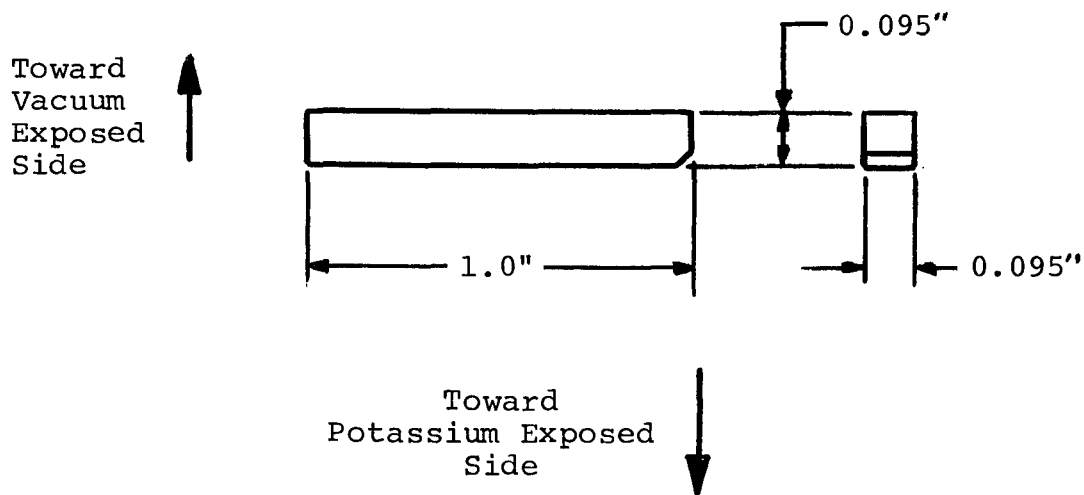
Beryllia Modulus-of-Rupture Specimen After Cutting and Grinding.
